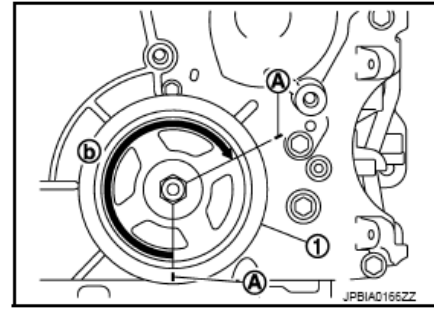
Rotating Crankshaft 240 Degrees Clockwise
